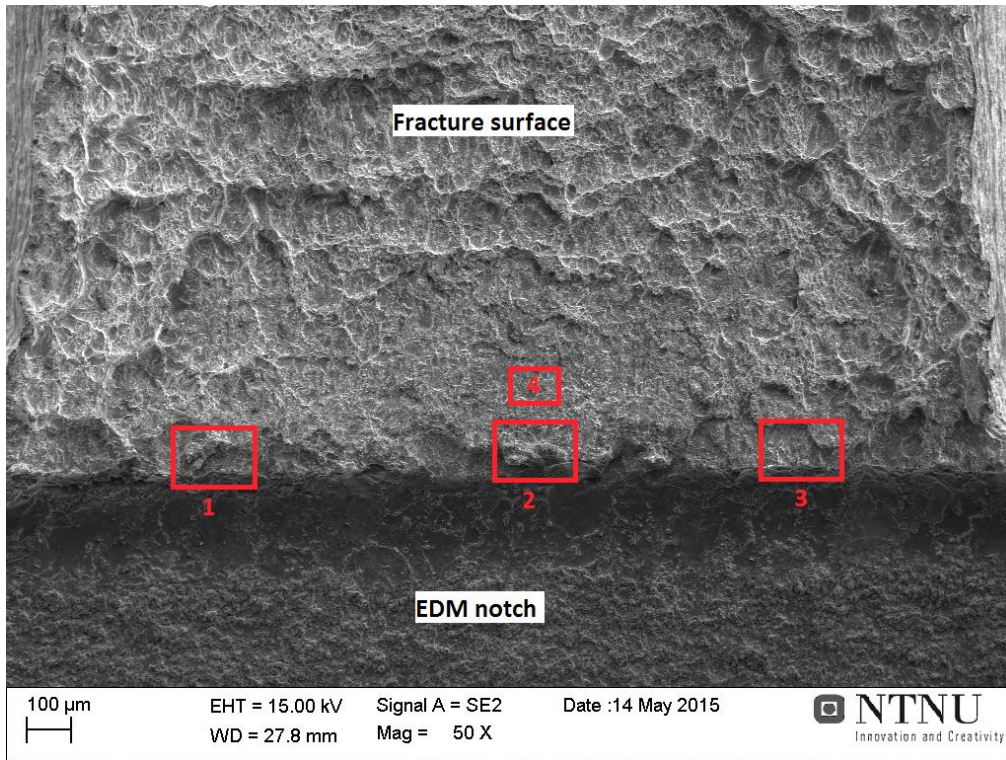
Sample B, test 4, fracture surface on BM section of specimen.
